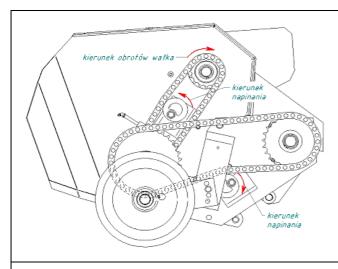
ADJUSTMENT OF THE ROLLER DRIVE CHAIN
